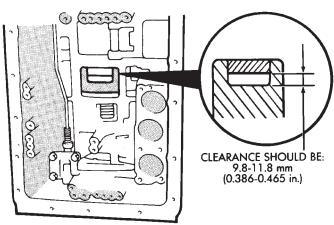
Checking Input Drum-To-Direct Clutch Drum Clearance
